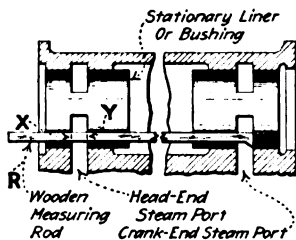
Using measuring rod for determining steam-port locations and widths.
